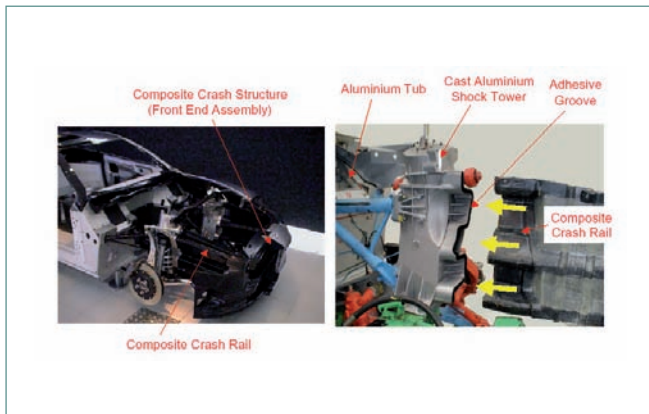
Aston Martin Vanquish - Front assembly bonded on after engine installation [10].
